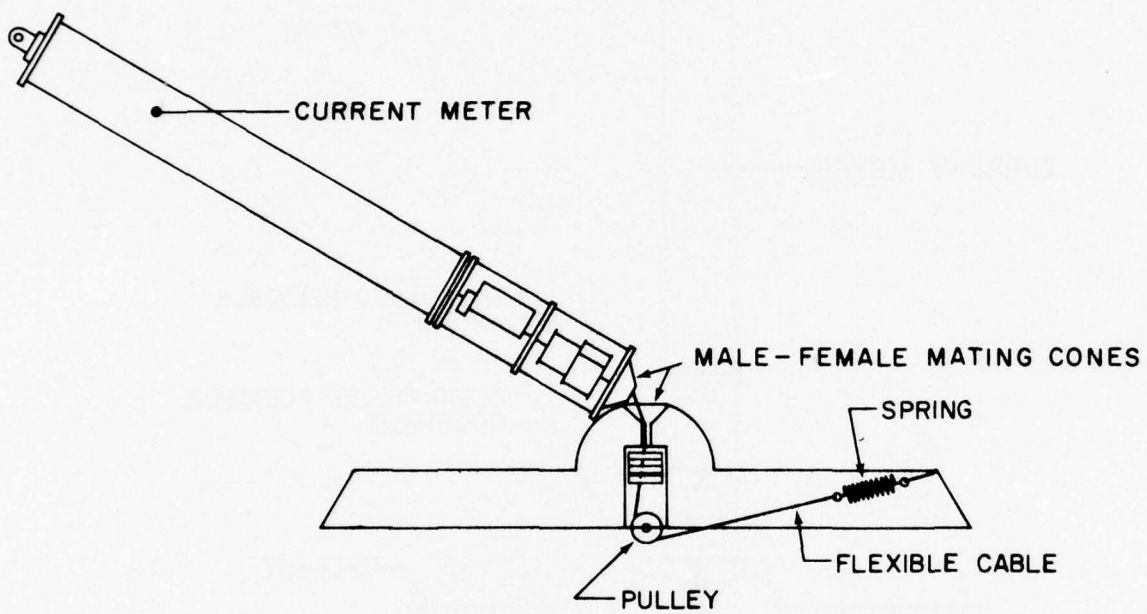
Spring Loaded Flexible Cable (Long Reach Cable)
